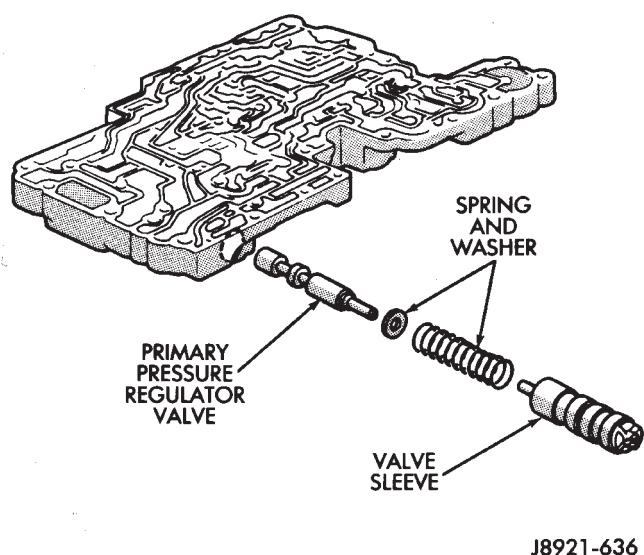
Removing/Installing Primary Pressure Regulator Valve
